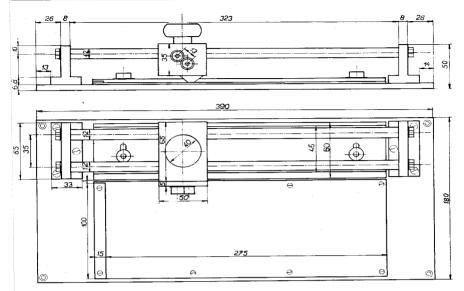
Technical draft serving for constructing the apparatus [the numbers give the dimensions n mm]
